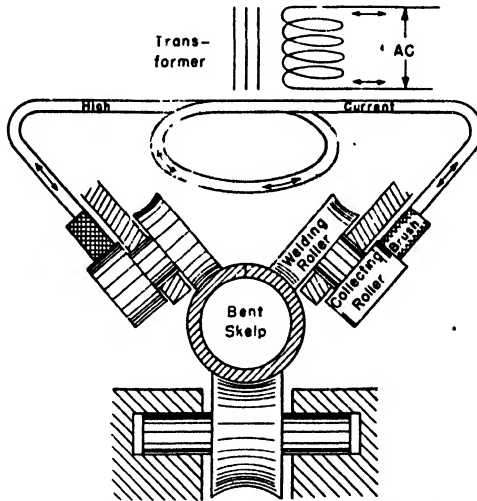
Butt welding pipe seam by electrical resistance method.
